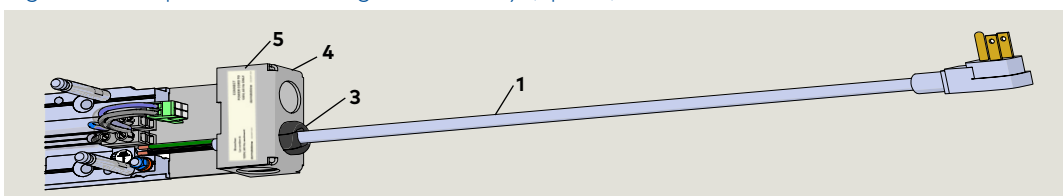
PC power cord wiring kit assembly (option)
